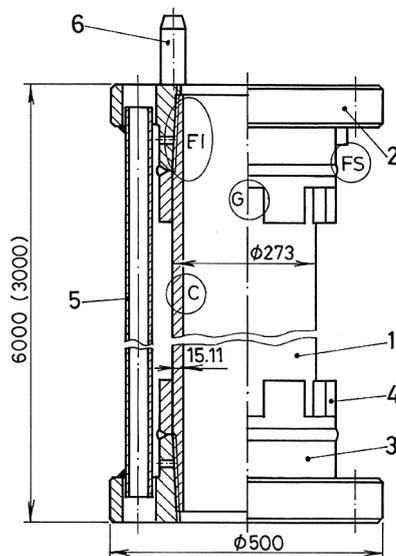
Drilling pipe with air tubes: 1– body; 2 – upper flange; 3 – lower flange; 4 – collar with crenels; 5 – air tube; 6 – centre bolt.
